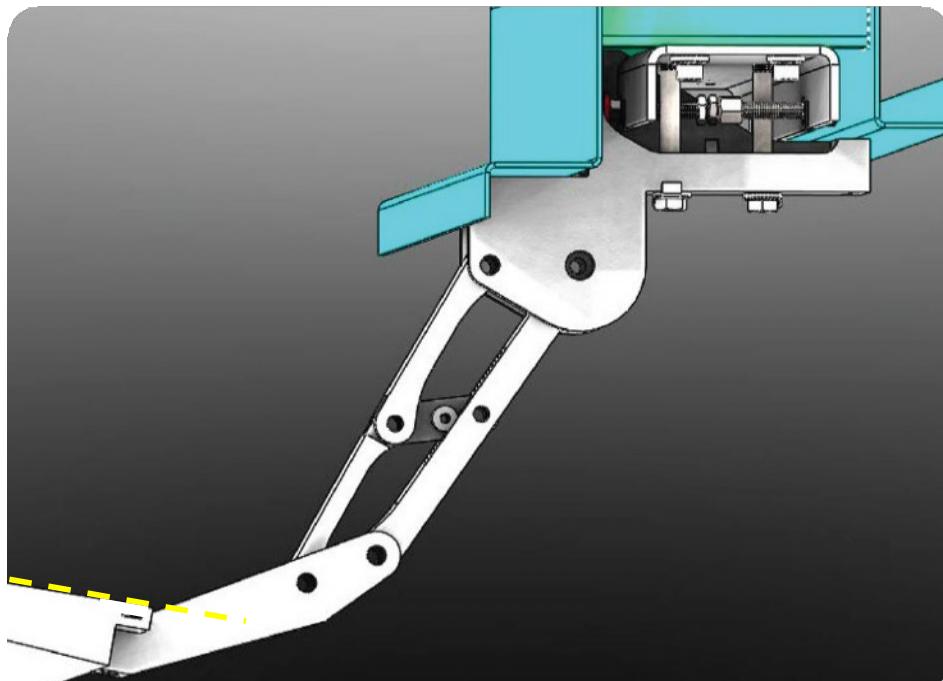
Complete assembly Tread surface has 7° incline, design-related
